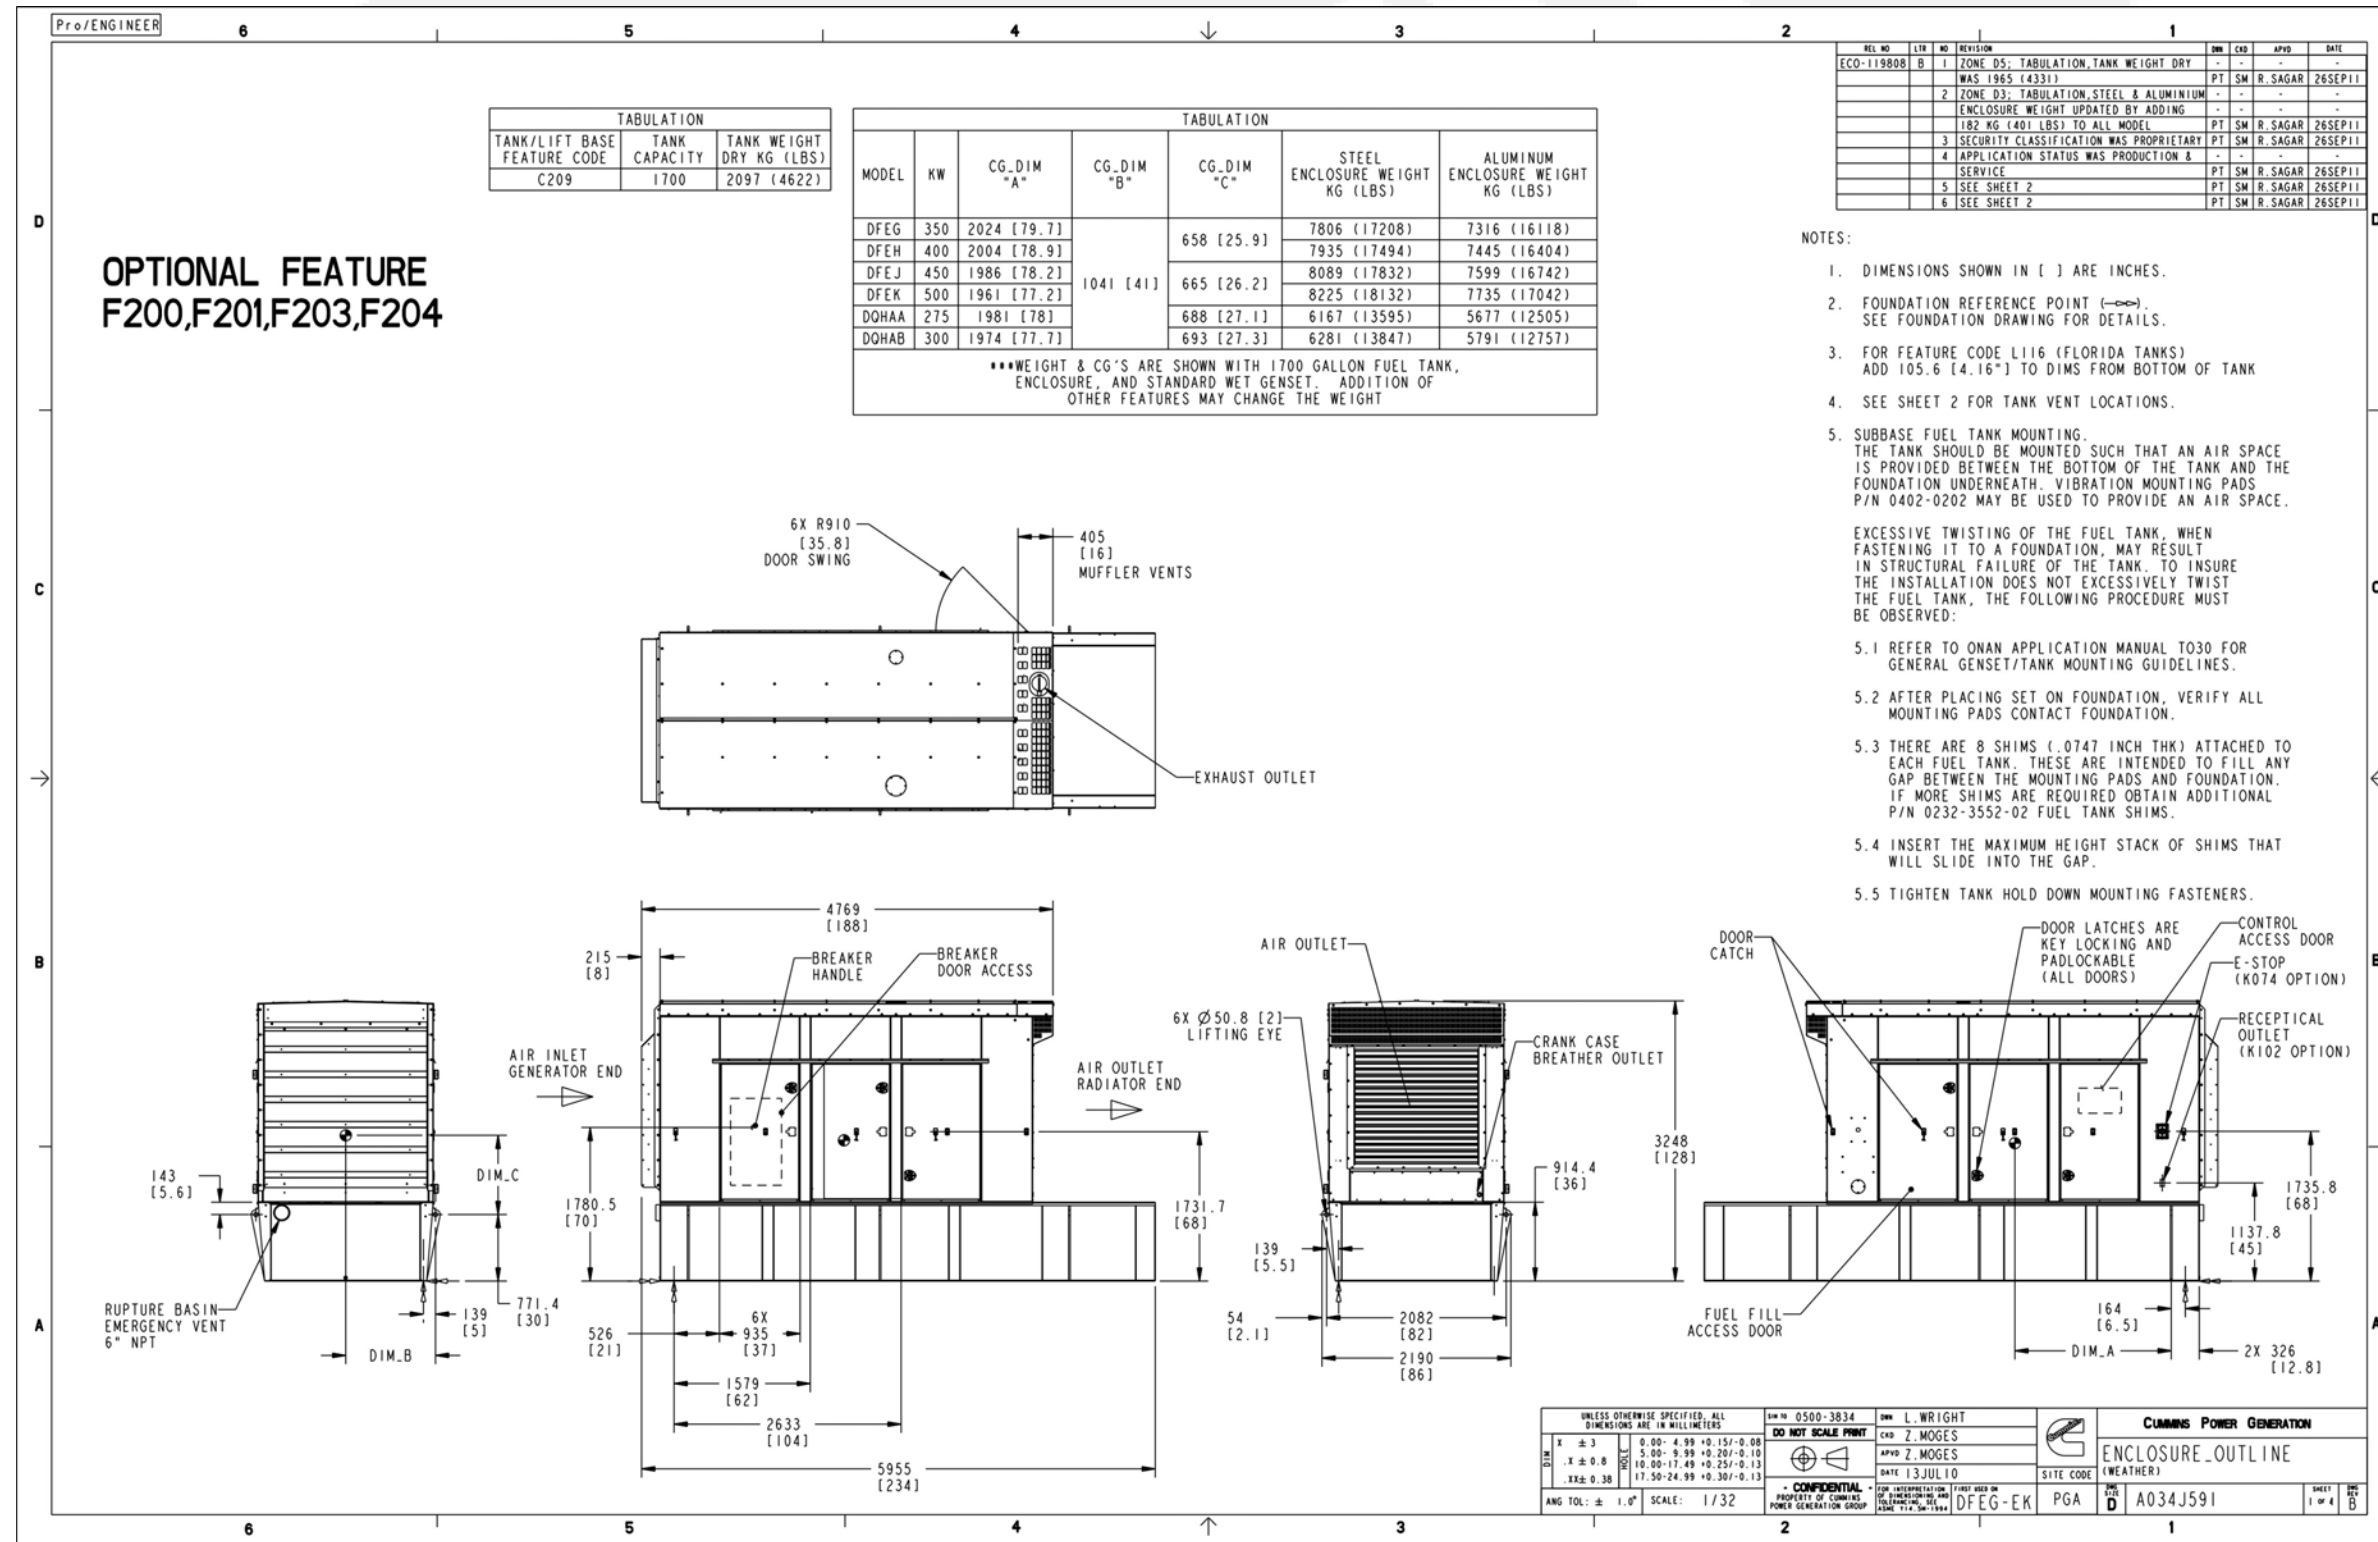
ENCLOSURE OUTLINE DRAWING (F200, F201, F203, F204, F206) (SHEET 1)
